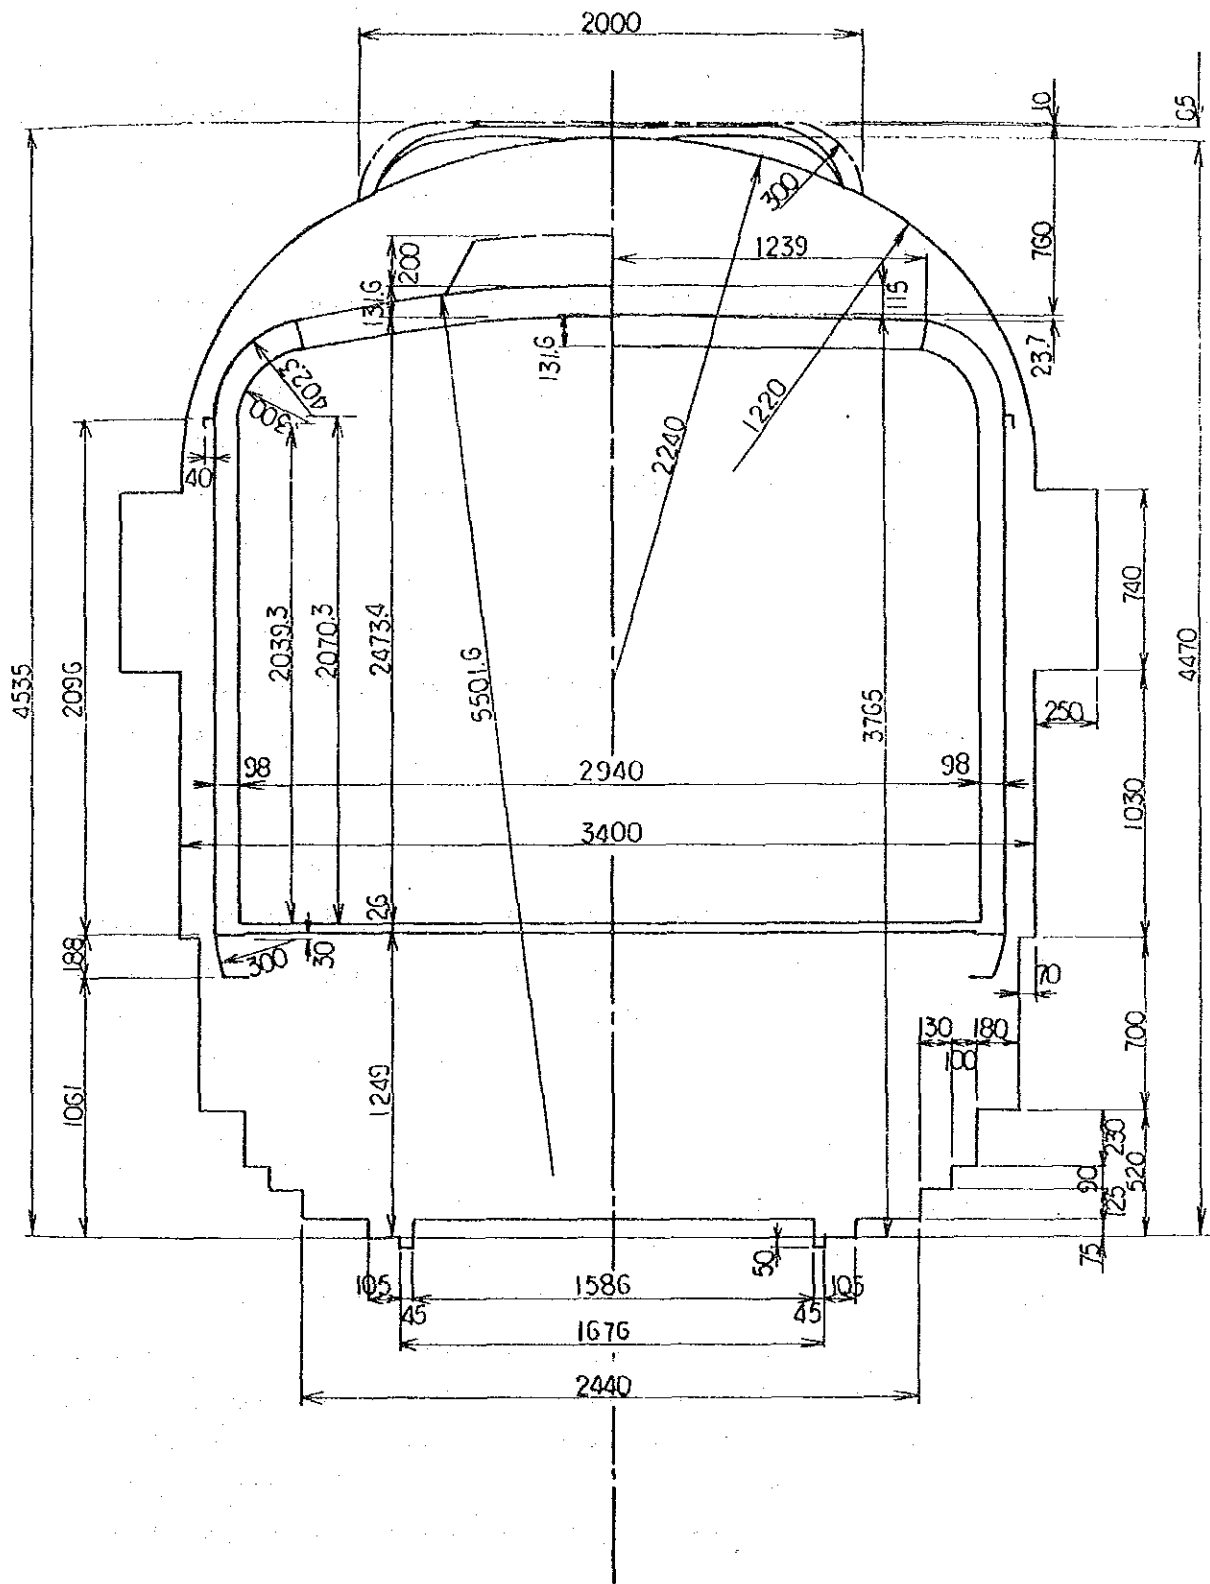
Rolling Stock Dimensions and Rolling Stock Gauge
